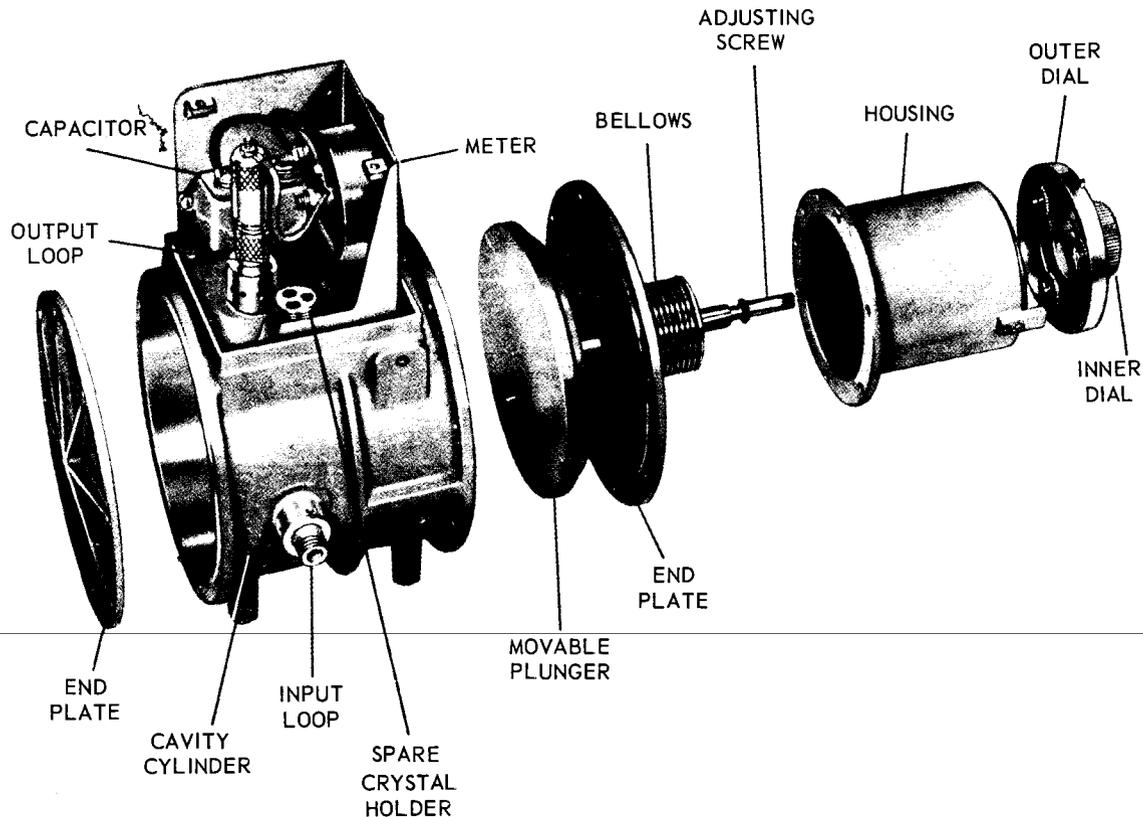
Exploded view of the TS-275/UP echo box.
